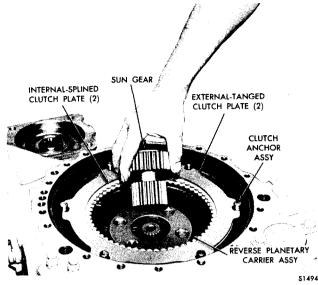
Installing forward and reverse sun gear (-3 model)
